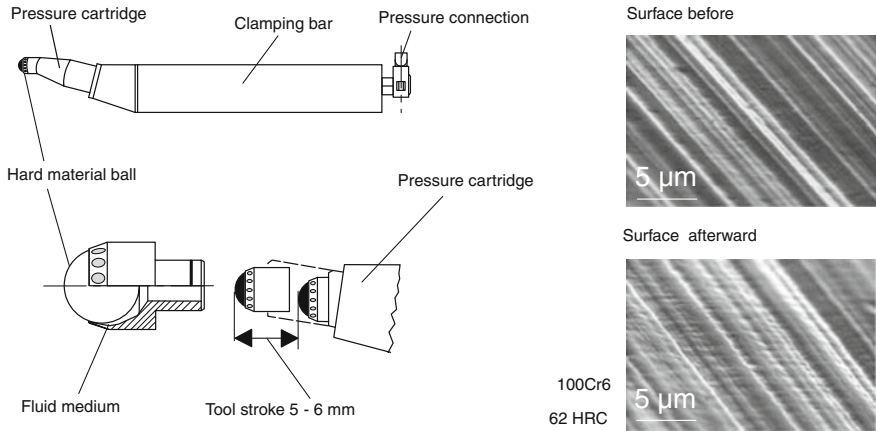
Hydrostatically mounted smooth rolling tool, hard-turned and hard smooth rolled surface
